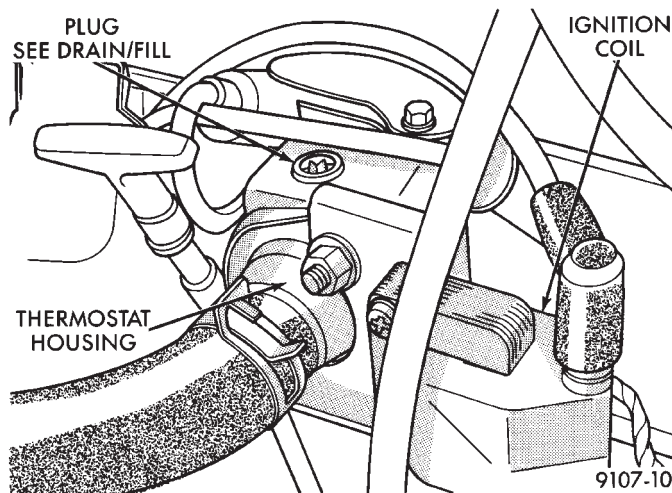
Thermostat Housing Drain/Fill Plug—2.5L Engine
